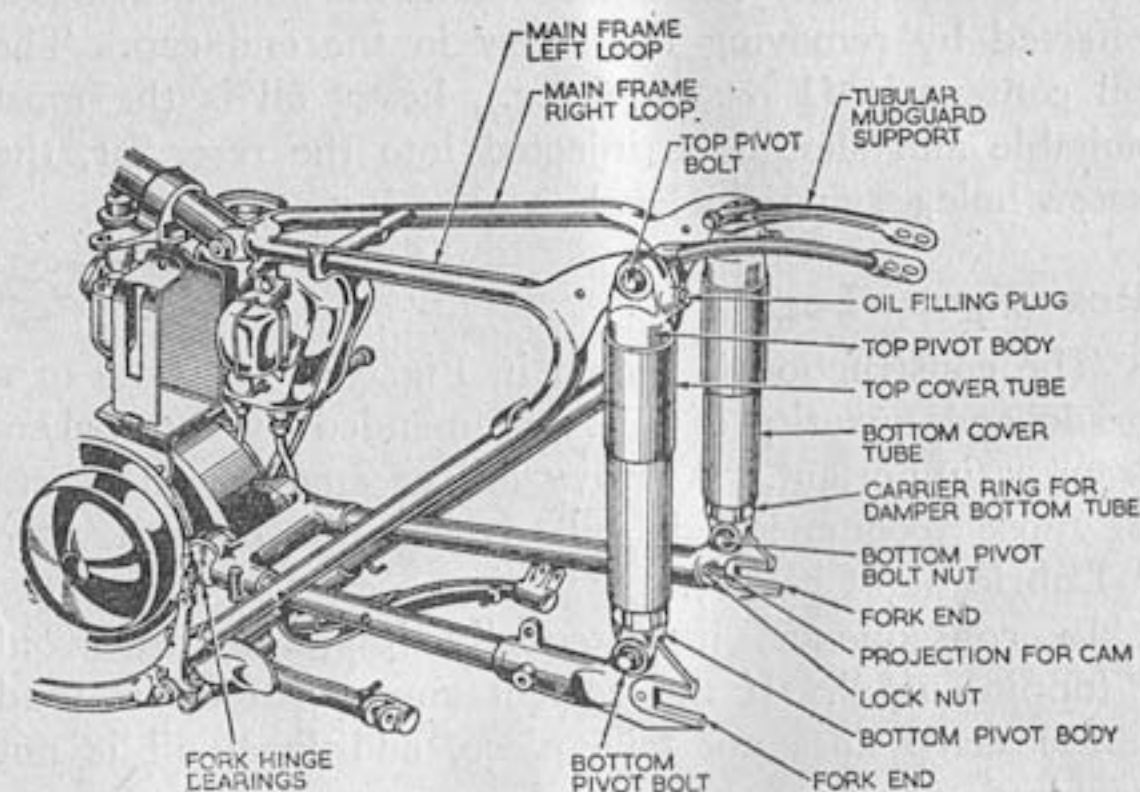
REAR SPRUNG FRAME AND "TELEDRAULIC" LEGS.
